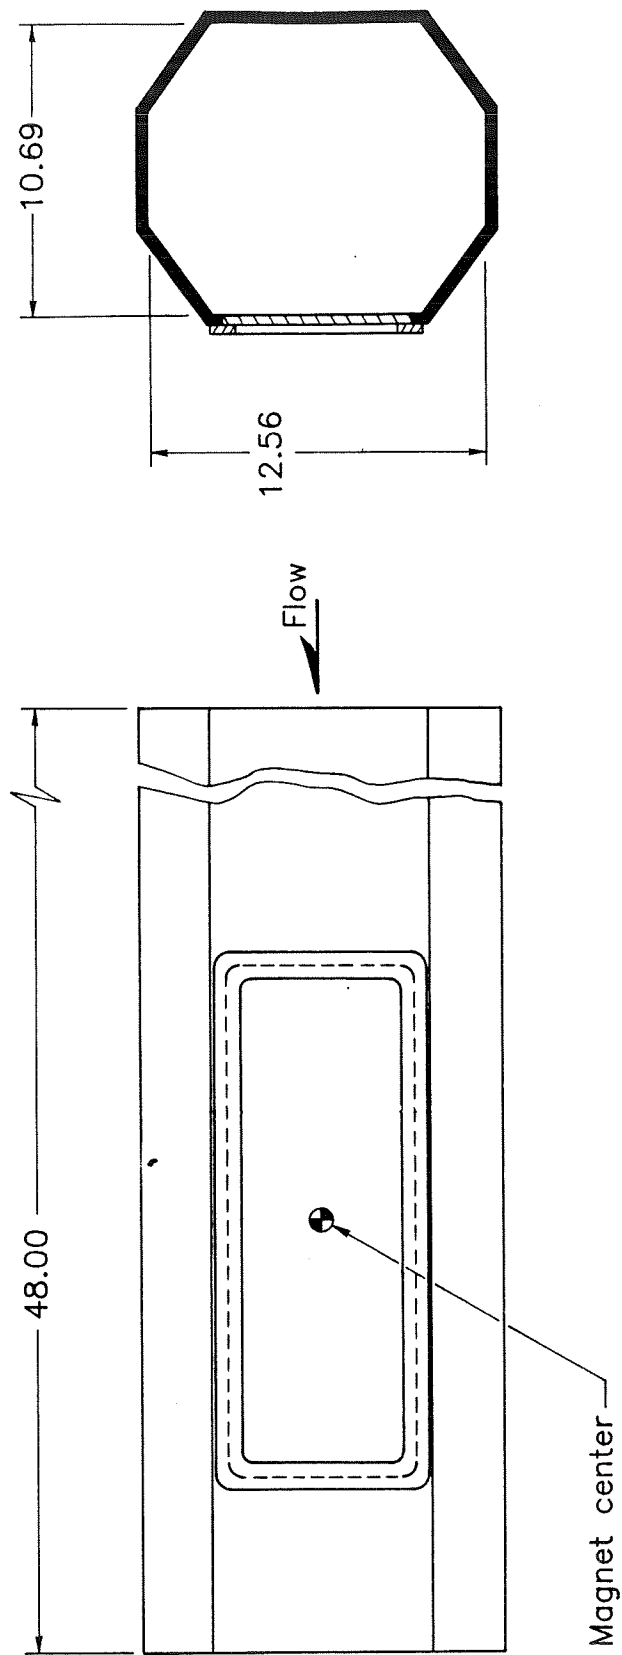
Sketch of 13" MSBS wind tunnel test section.
